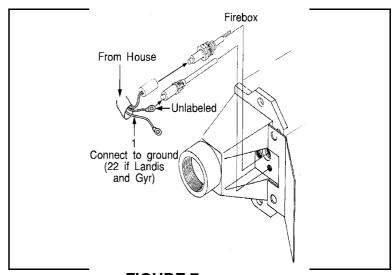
(MSIN0108AE) Installing Gas Dryer Fire Box Connections
